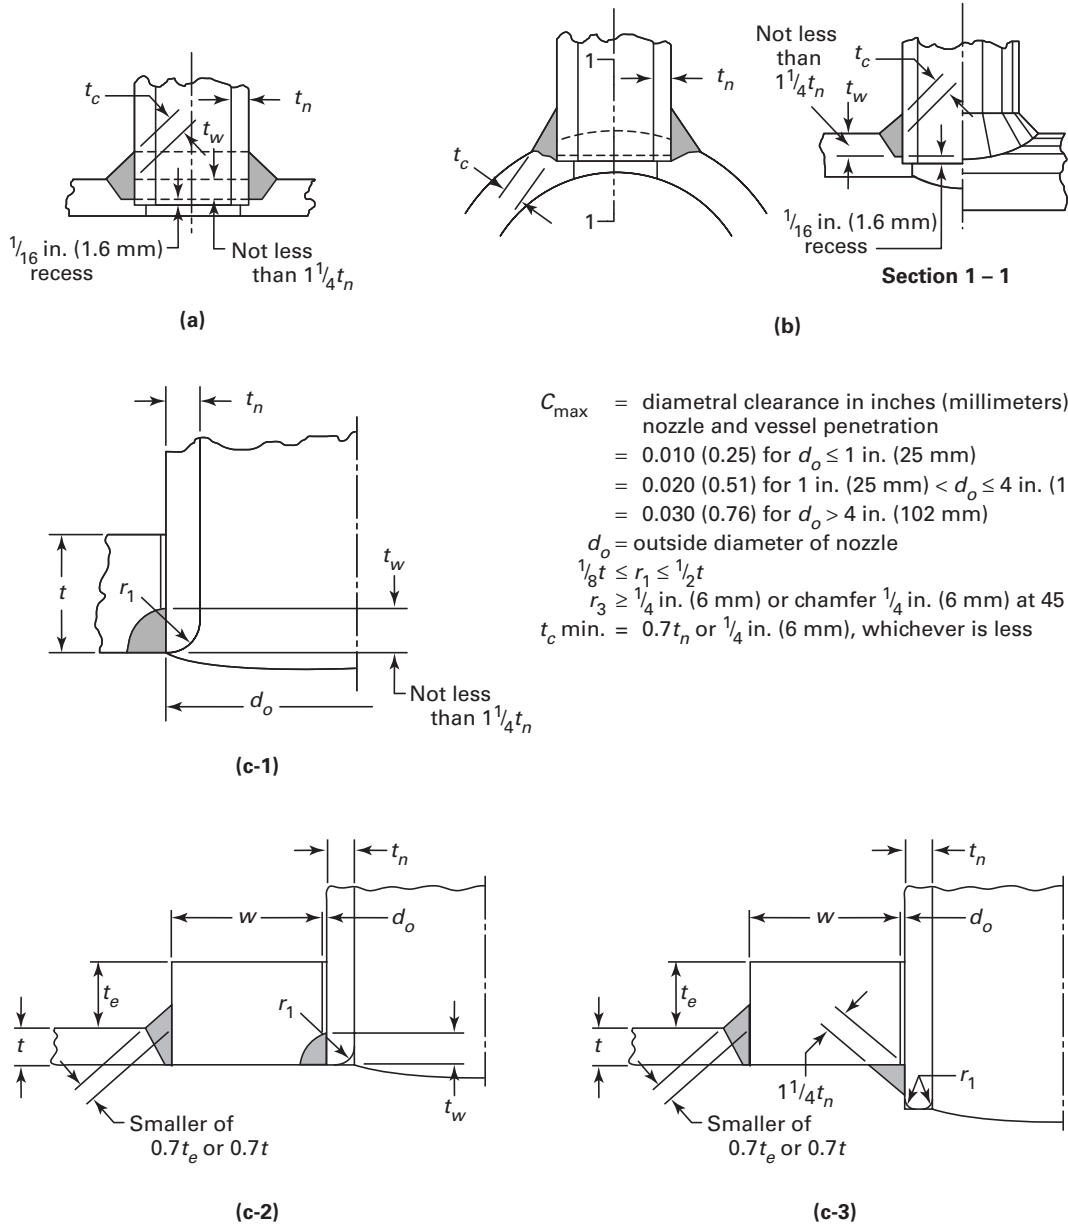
PARTIAL PENETRATION WELD CONNECTIONS
